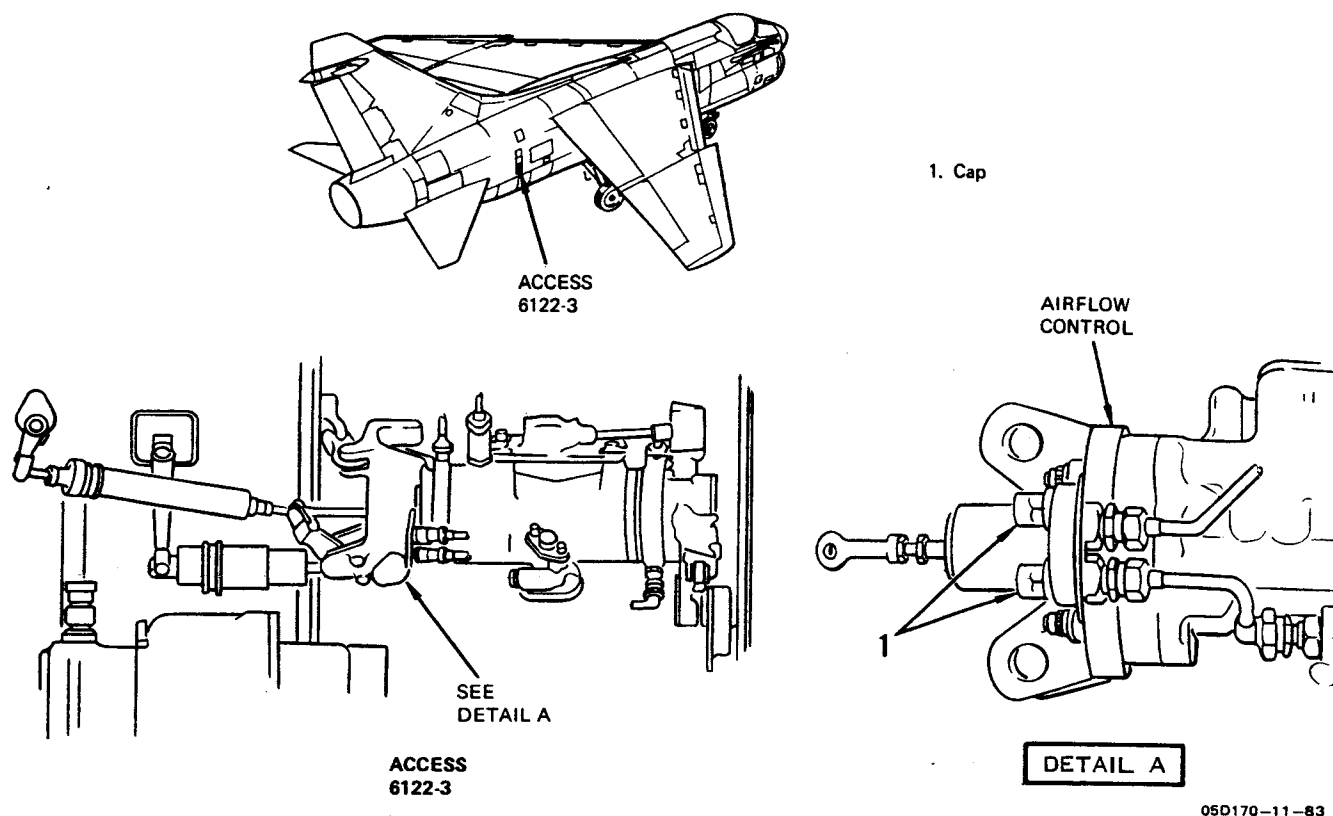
Pressure Test; Hydromechanical Governor (HMG)
